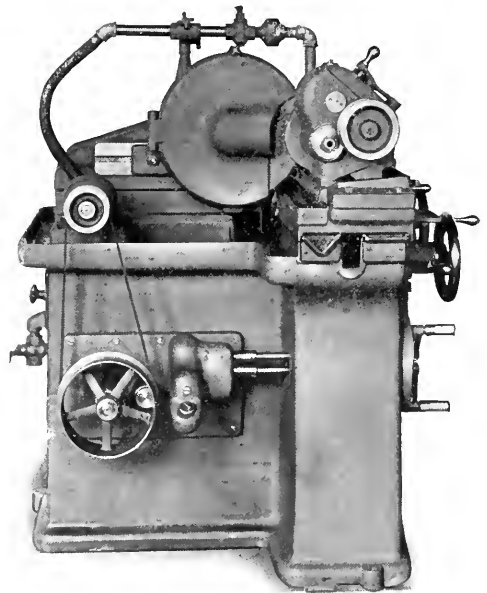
End View of Fitchburg Style A Plain Grinding Machine
